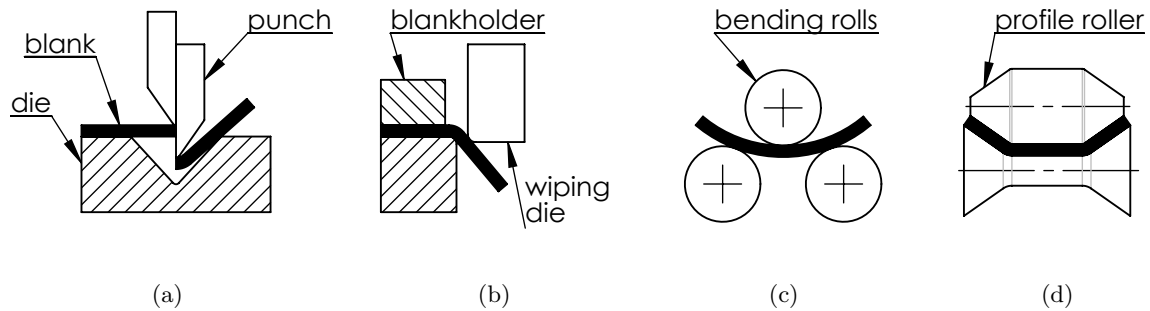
Basic bending processes: (a) V-bending or air bending, (b) folding or wiping, (c) roll-bending, (d) roll forming
